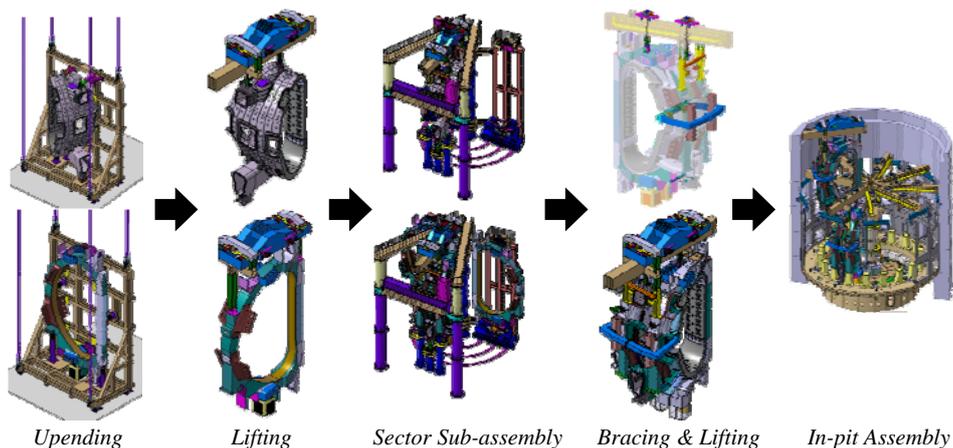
Overall configuration of the sector sub-assembly and in-pit tools.
